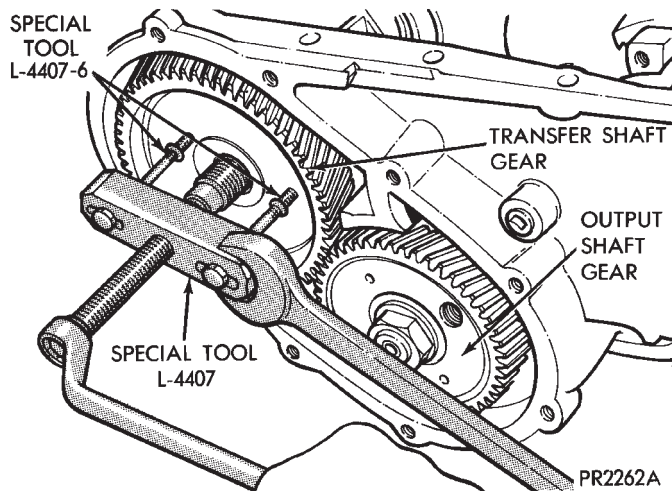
Remove Transfer Shaft Gear Retaining Nut
